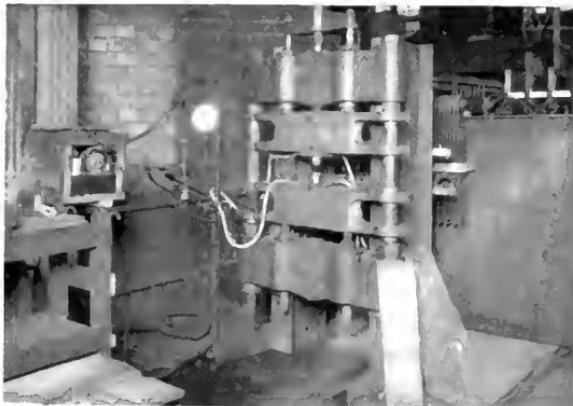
Electric Welding Machine of 36 Tons Pressure Capacity and 100,000 Ampere Current Capacity, Built to Determine the Practicability of Spot-welding Heavy Plates. The transformer (at the right) furnishes the welding current, and the meters in the box (at the left) were used while making the initial welds to record the values of current, pressure, and time
